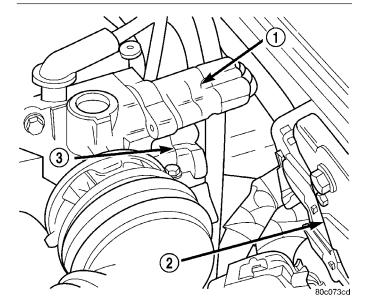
Idle Air Control (IAC) Motor and Throttle Position Sensor (TPS) Wiring Connectors
